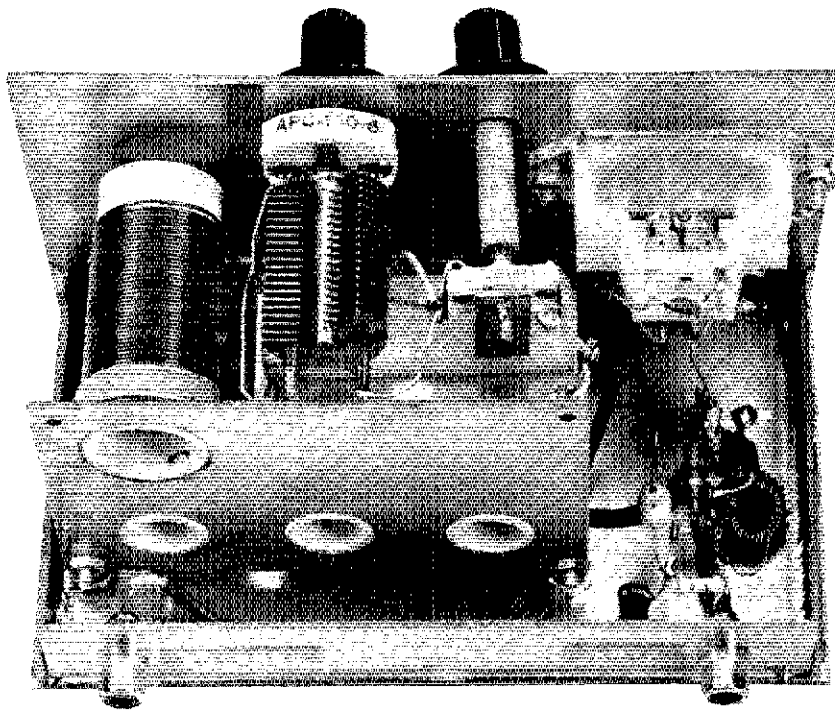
Interior view of the assembled ATU. "Ugly construction" (see text) is used for the SWR-bridge circuit, lower right. The subassembly, chassis and panel are made from pieces of single- and double-sided PC board. The seams are soldered to hold the sections together.
